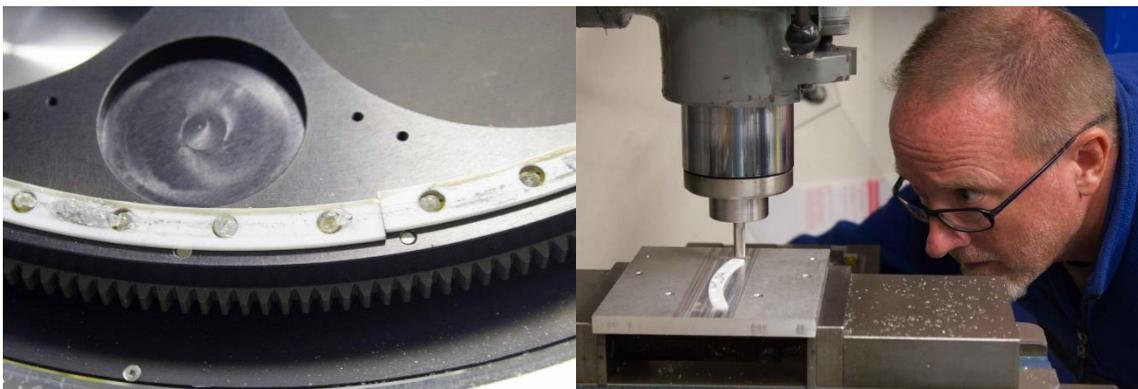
Left: Image showing some of the damaged sapphire balls in the lower filter wheel prior to removal. Right: Careful machining of new Teflon spacers.
